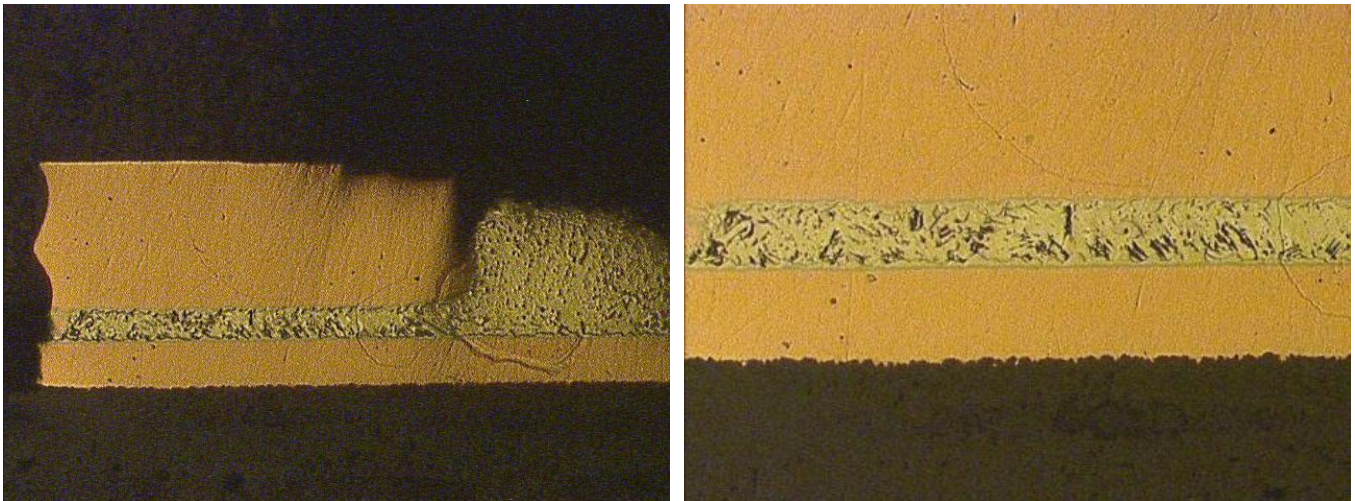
QFN-20 Solder Joints, Board 167, Component U15, SAC305/SnPb, DNF
